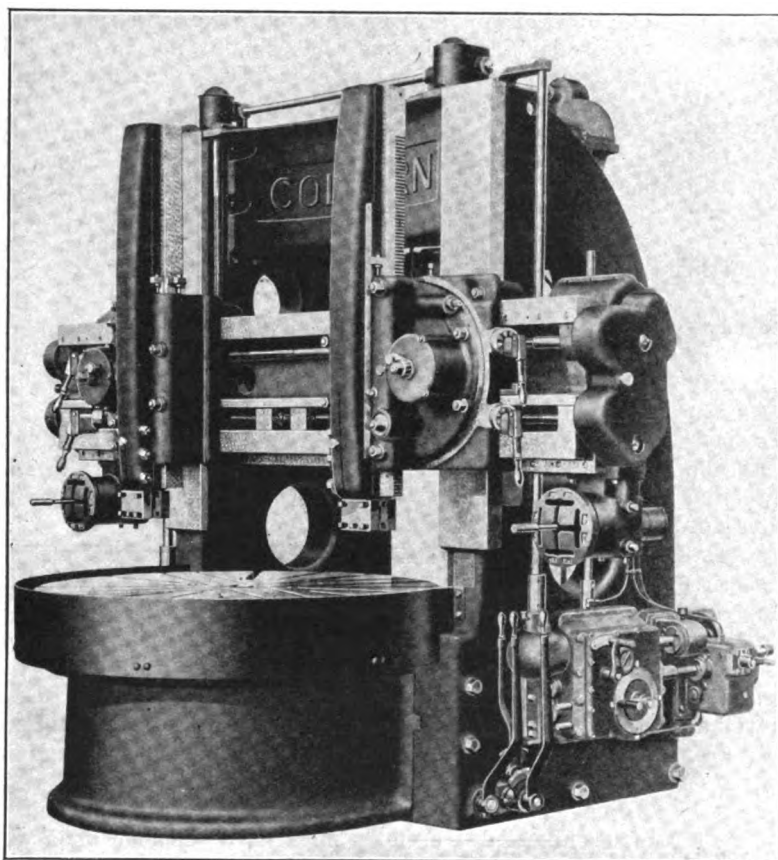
COLBURN 42-IN. HEAVY-DUTY TWO SWIVEL HEAD BORING AND TURNING MILL
